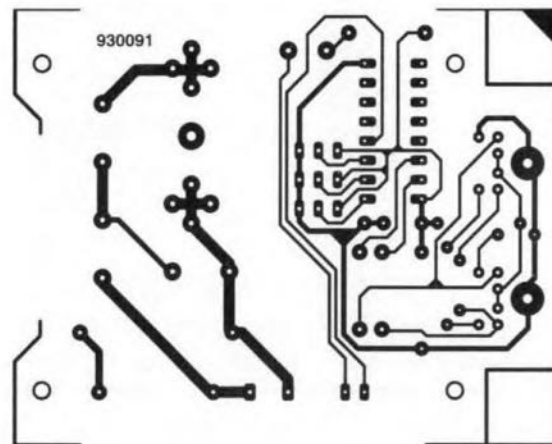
Track layout and component mounting plan of the single-sided printed circuit board designed for the I²C power switch.
